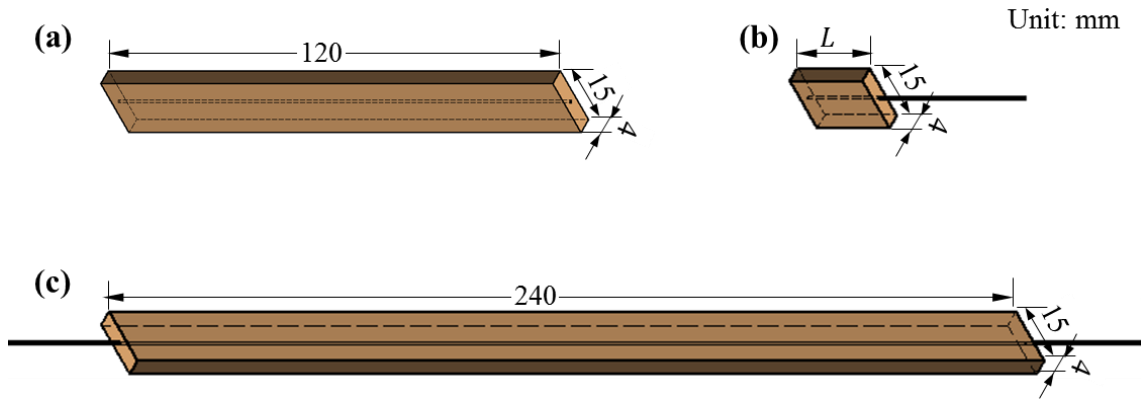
The dimensions of CC-HNBR model composite specimens for (a) wedge grip fatigue tests, (b) pull-out experiments,  $L=5.8, 6.1, 10.3, 19.1, 19.5, 21.1, 24.7, 25.0, 30.9$  mm respectively, and (c) bollard fatigue tests.
